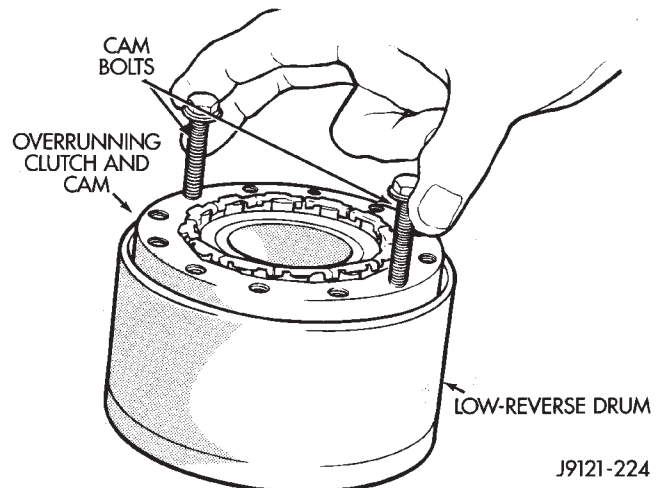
Removing Overrunning Clutch From Low-Reverse Drum
